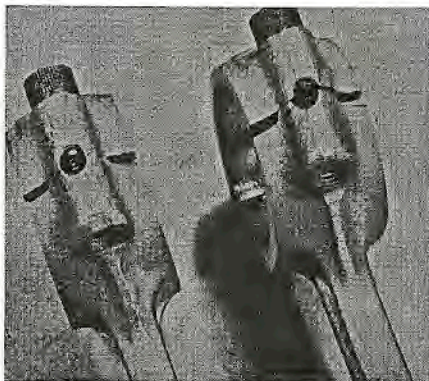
Assembled views of fractured rod showing correct and incorrect cap installation.
